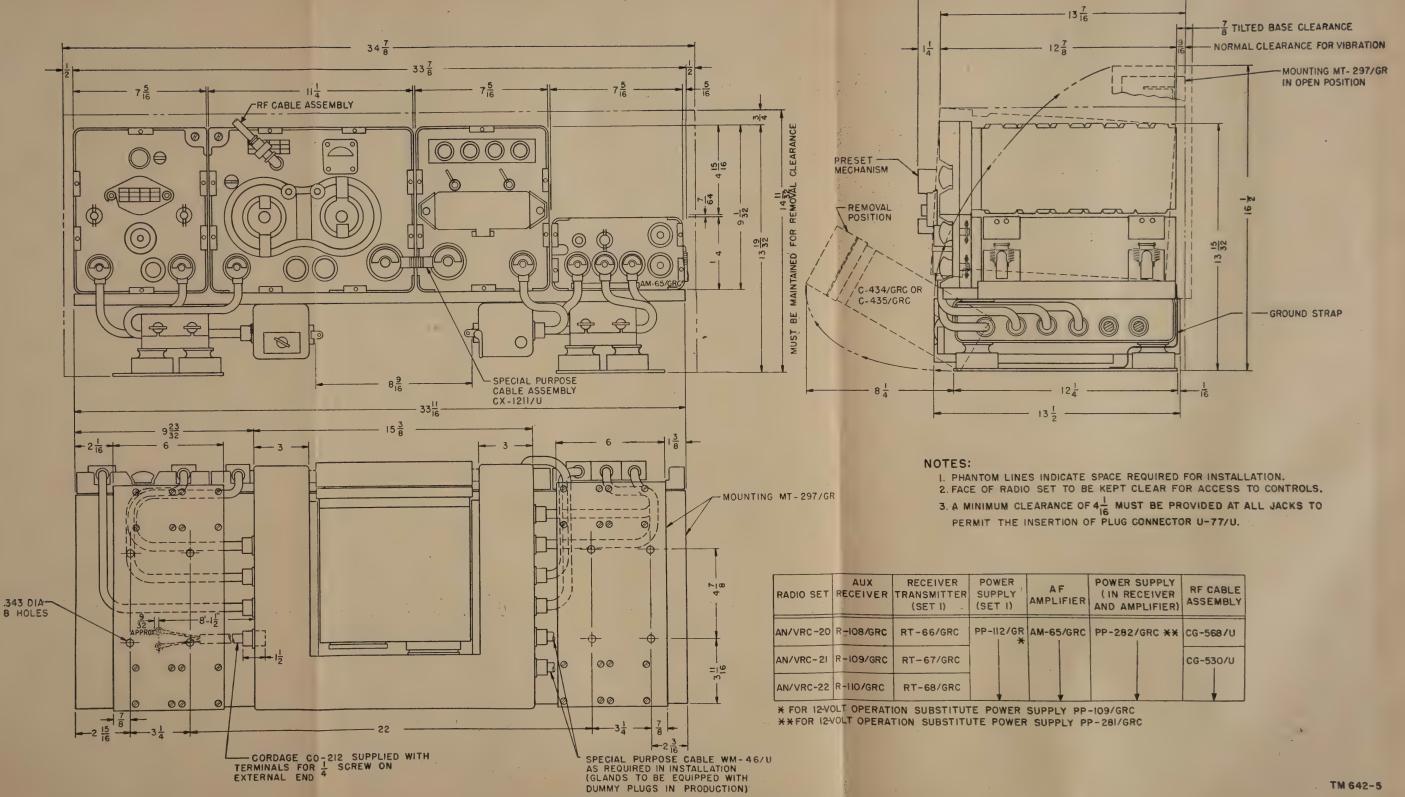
Radio Sets AN/VRC-20, -21, and -22, outline drawing.
